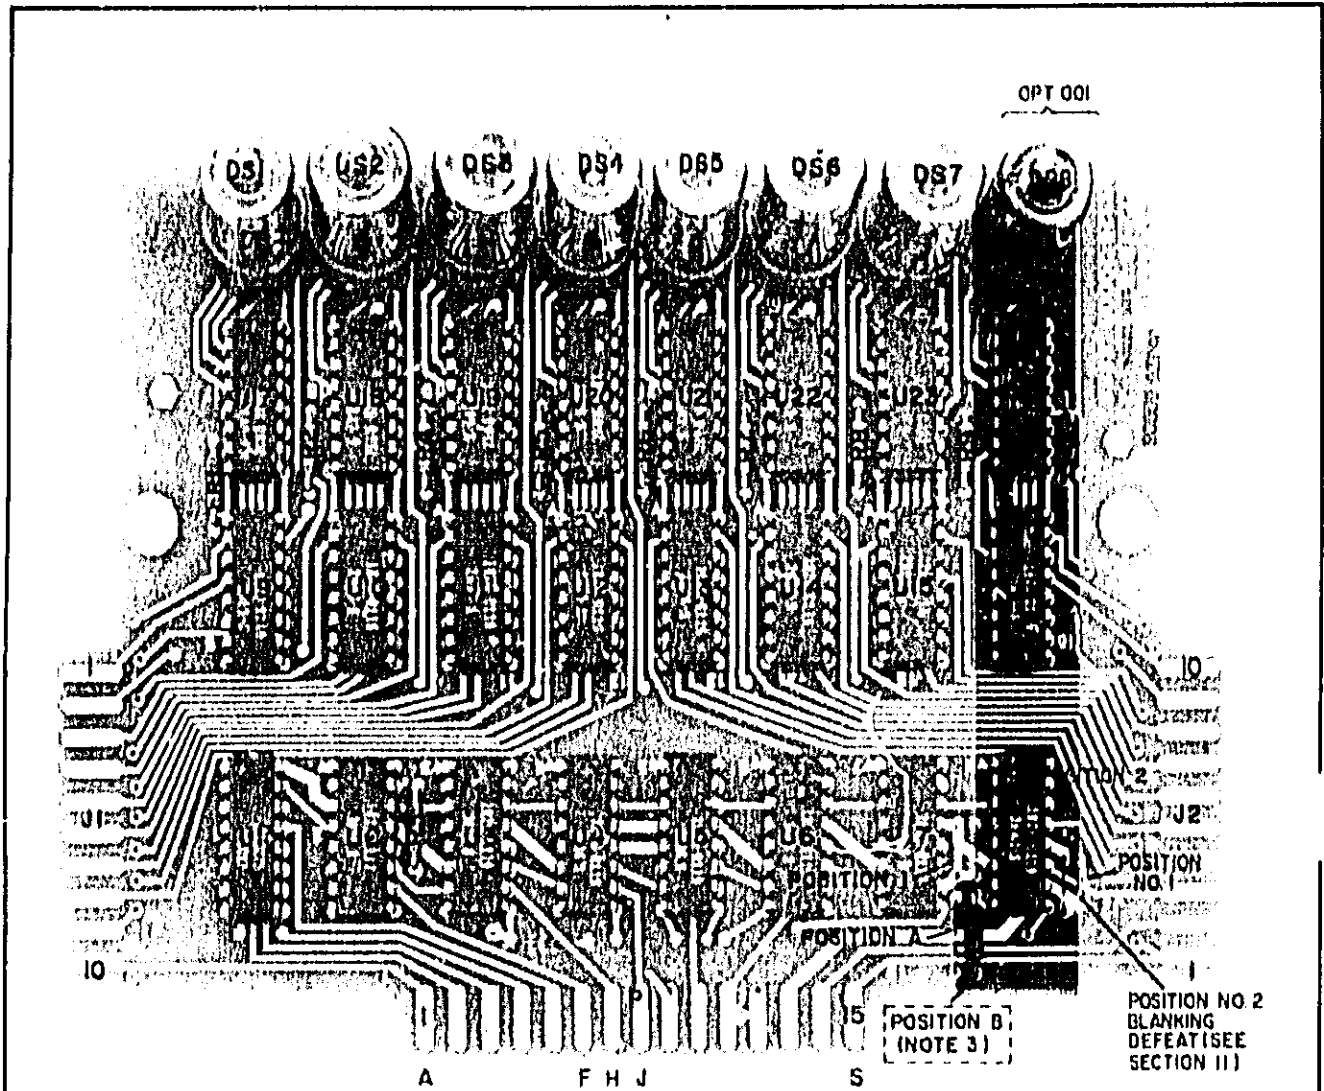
A9 Display Assembly (Option 001), Component Locator
